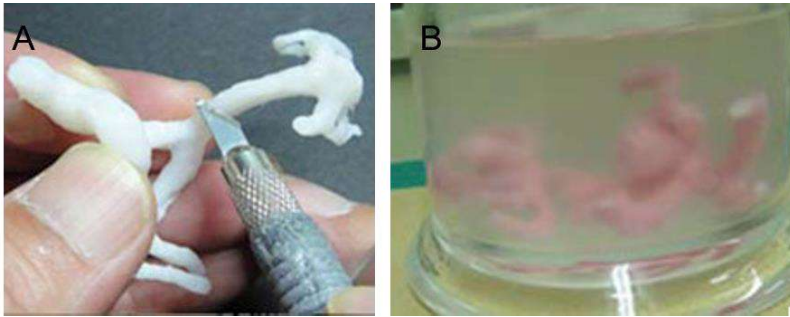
A fabrication method using 3D printed wax to make a complex inner structure. (A) The inner mold is 3D printed in wax. (B) The phantom is demolded from the outer mold, and the inner mold is dissolved in ethanol. (Adams et al., 2017)
